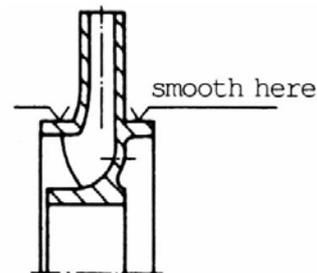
Smoothing out the throttling sections on the impellers, see fig. 18a.
